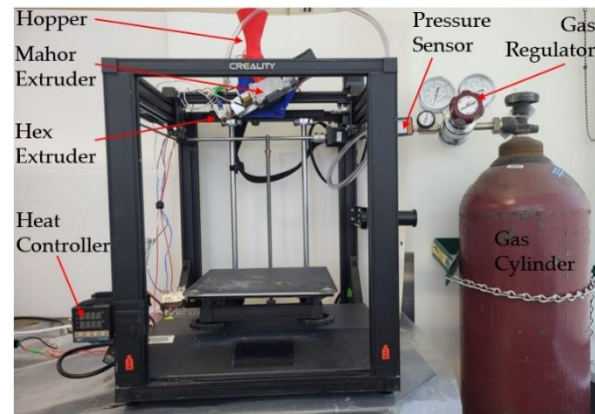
Experimental setup of the full extruder head mounted to the printer and the gas cylinder with the pressure sensor and regulator.
